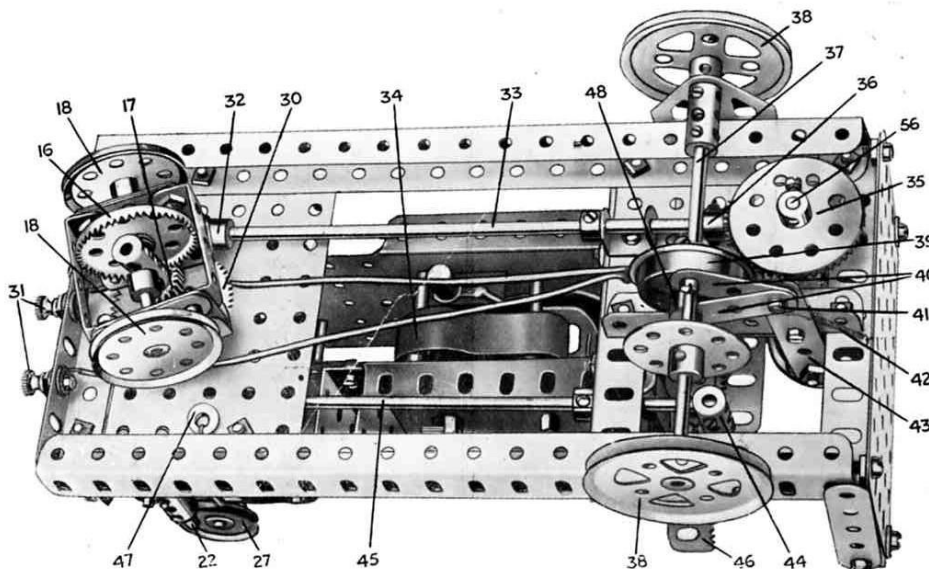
Underneath view of chassis, showing "castor," steering transmission, and internal expanding brake on front road axle.
